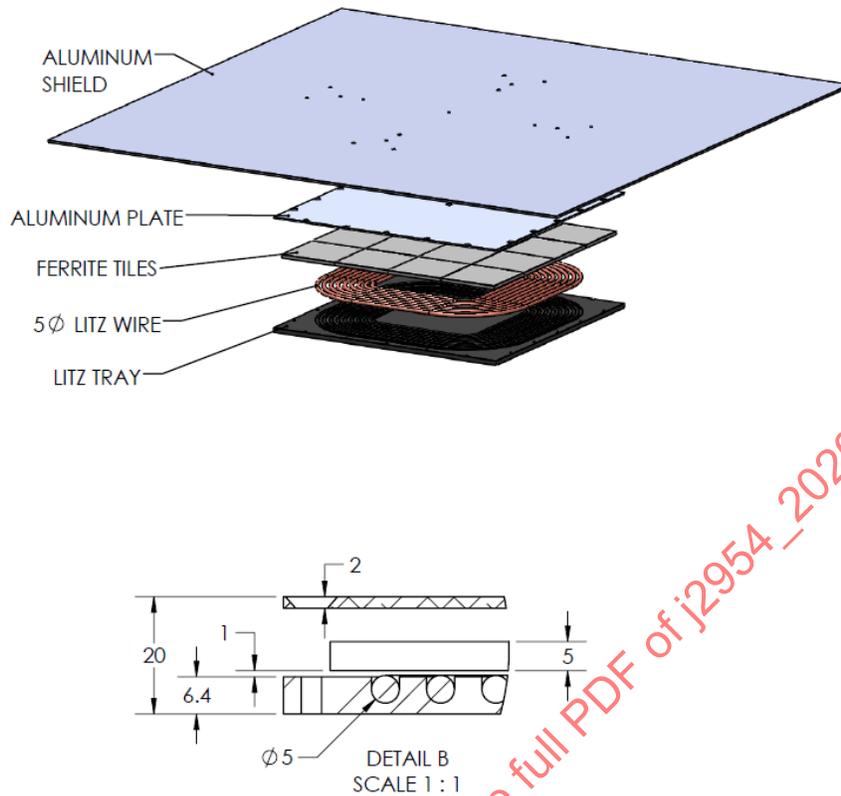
Exploded view of the Test Station VA WPT2/Z2
